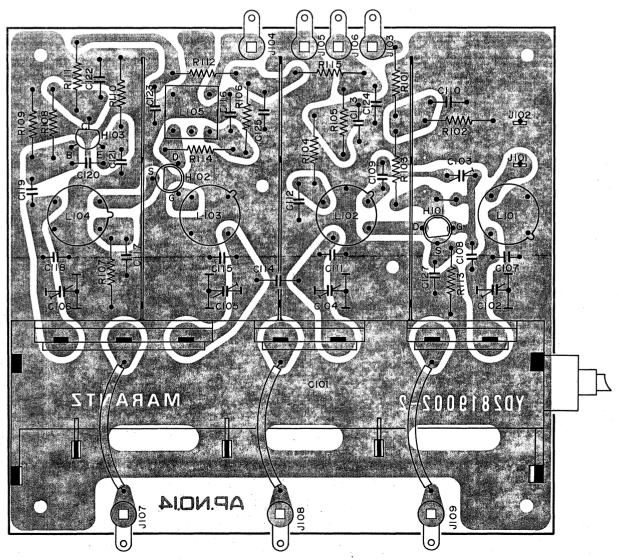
FM Front End Board — P100 Component Assembly Diagram
